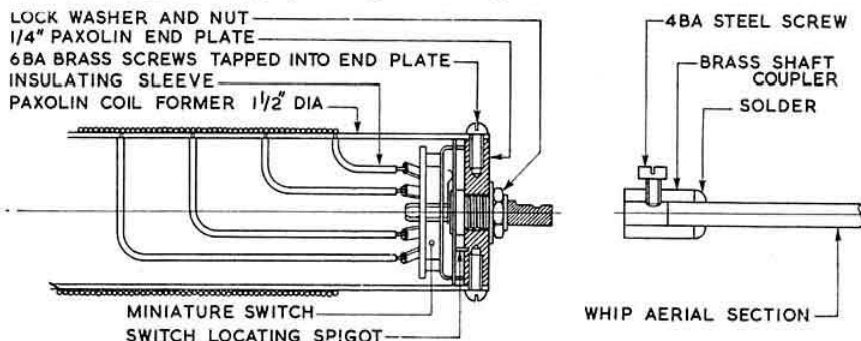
Mounting of the switches on the end plates and the method of connecting the loading coil to the whip sections with shaft couplers.
